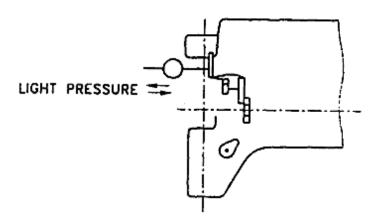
B THREAD TAKE UP LEVER (RIGHT ANGLE)
